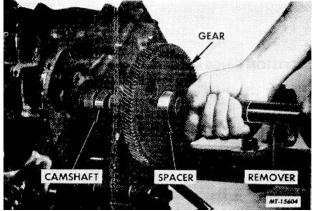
Removing Camshaft, Gear and Spacer as an Assembly
